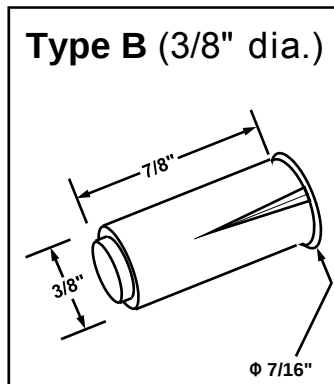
B: DRILL DOOR JAMB HOLE (EITHER 3/8" OR 3/4" DEPENDING ON TYPE)
